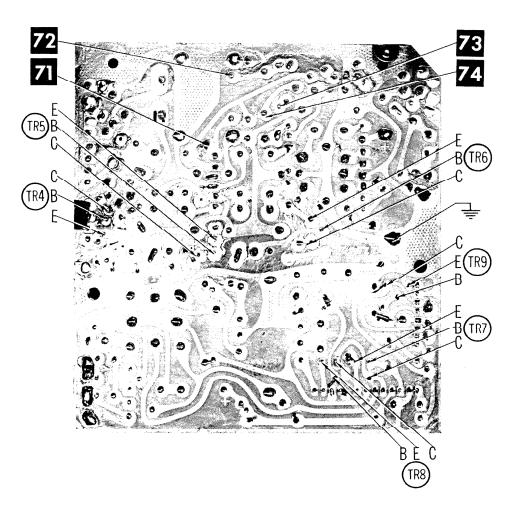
IF Printed Board Bottom View — Transistor CircuiTrace Points.
